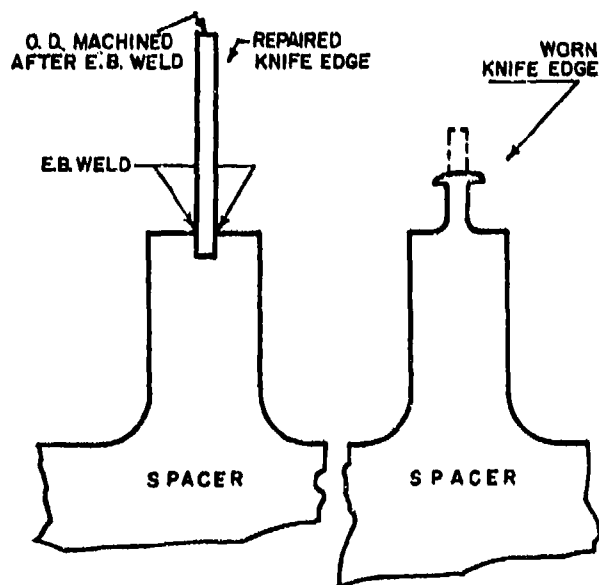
This sketch depicts a typical turbine spacer knife-edge repair by Electron Beam welding.
